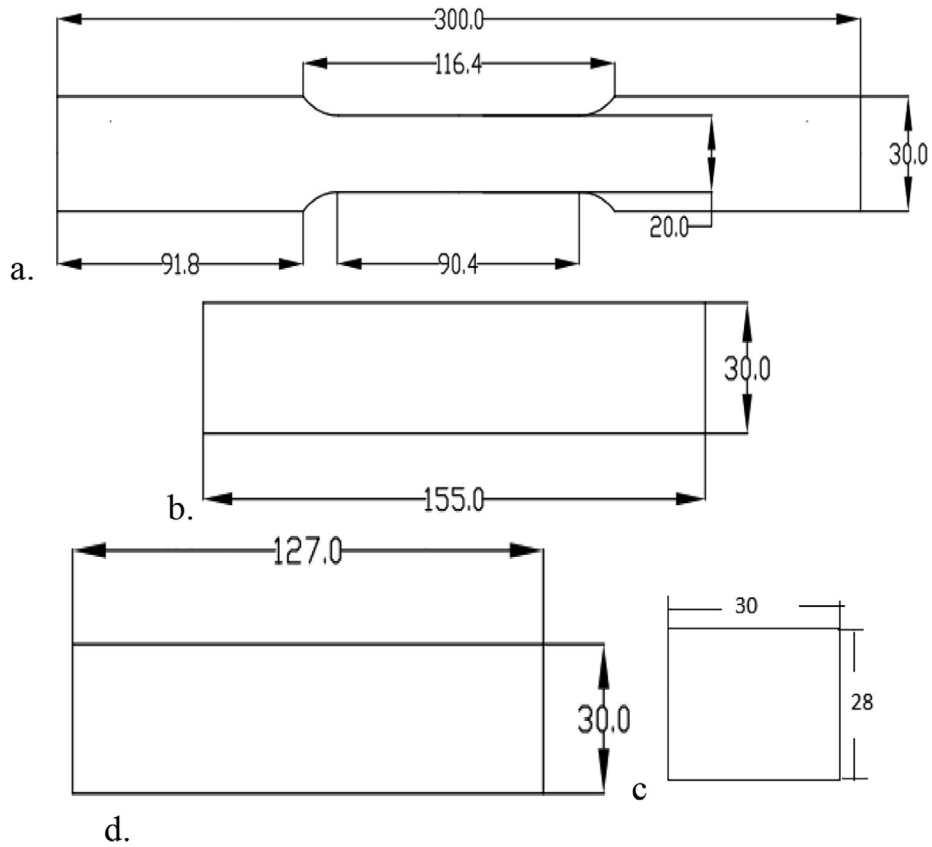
Test specimen dimensions – (a) Tensile Test Specimen (b) Compression Test Specimen (c) Bending Test Specimen d. Water Absorption Test Specimen.
